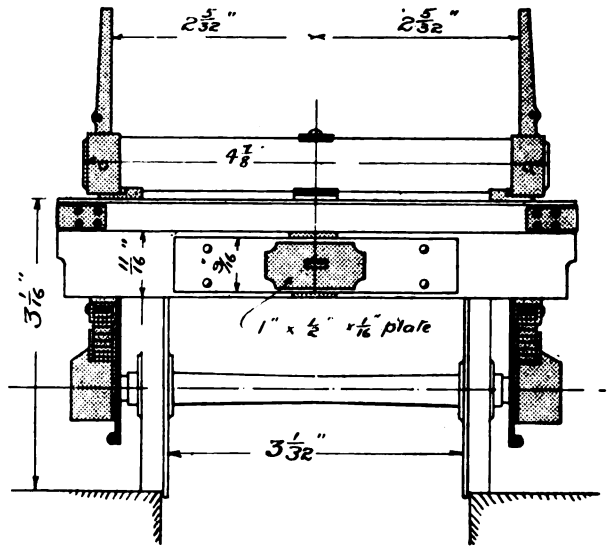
END VIEW, SHOWING CENTRE COUPLING.
